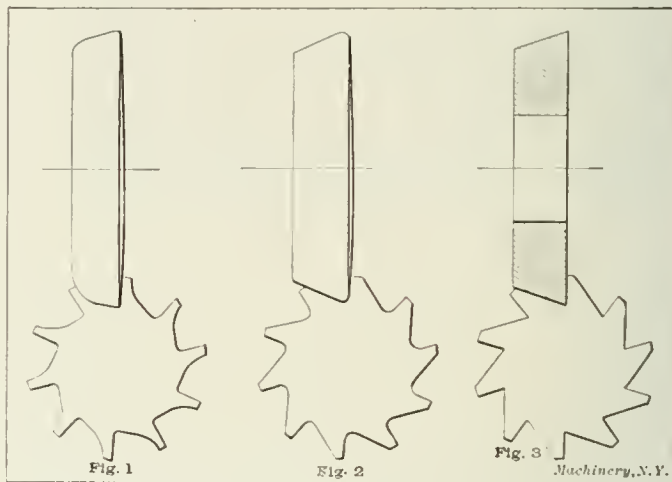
Illustration showing Reamer Tooth produced by a "Formed" Reamer Cutter
